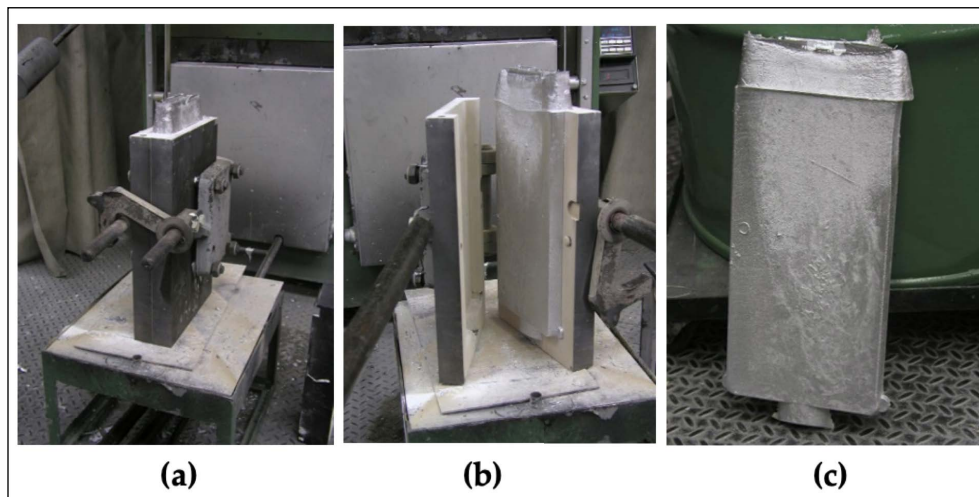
Casting of ingots of alloys used in the present study: (a) metallic mold with casting; (b) open mold showing casting inside; (c) actual casting
